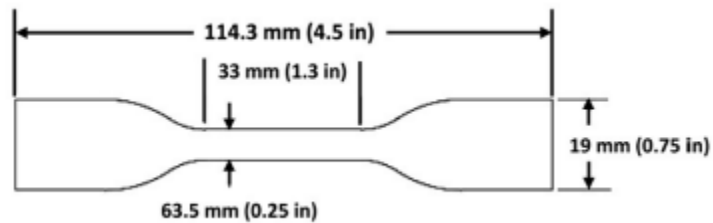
ASTM D638-14 Type IV Specimen Dimensions
